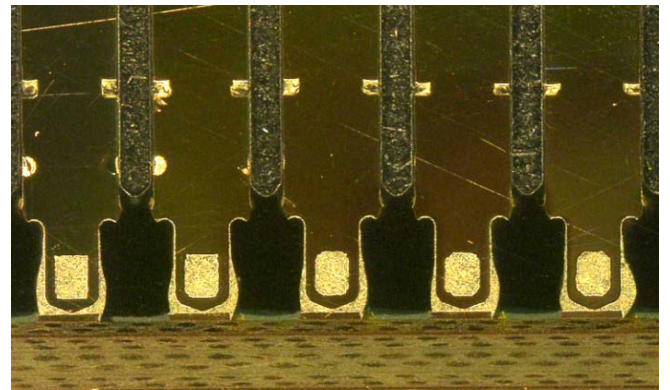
Macro View of SEARAY Connector, Sn/Pb Solder Process
